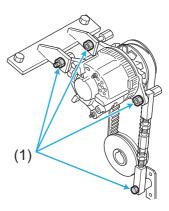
Belt Tension - Adjust (Retaining Bolt)
